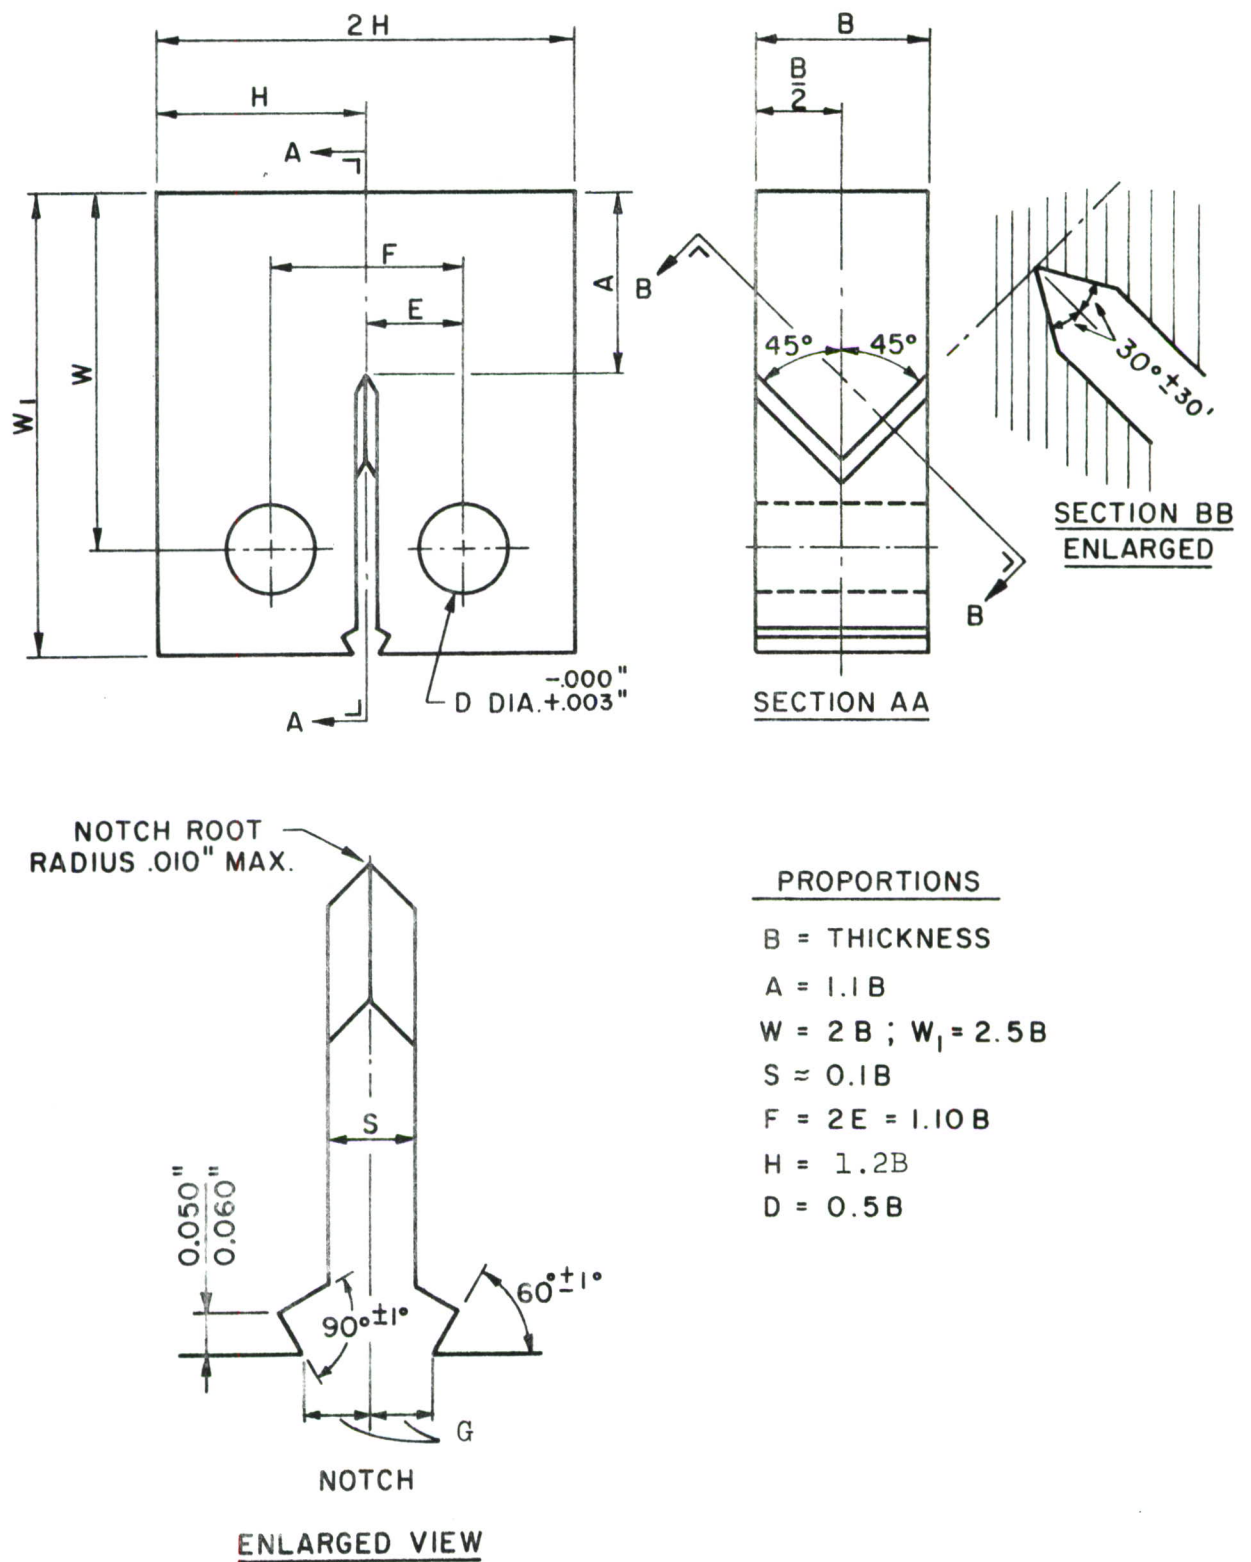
COMPACT TENSION FRACTURE TOUGHNESS SPECIMEN
